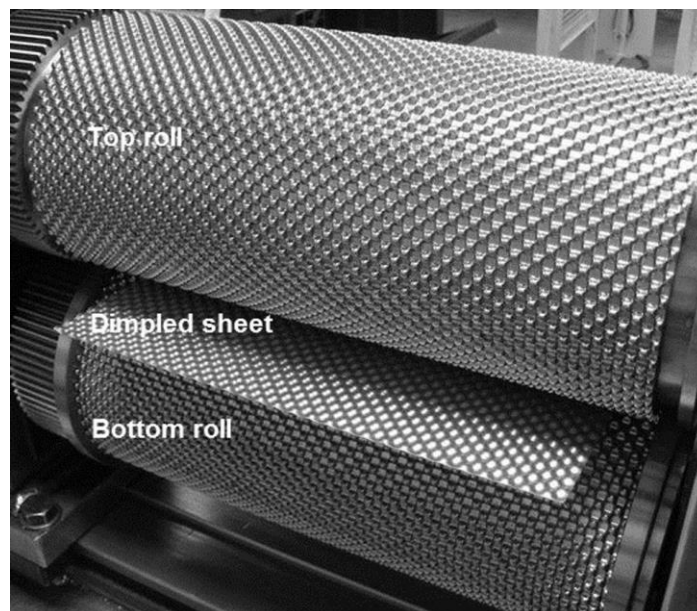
The UltraSTEEL® forming process and dimpled steel sheet [91]
